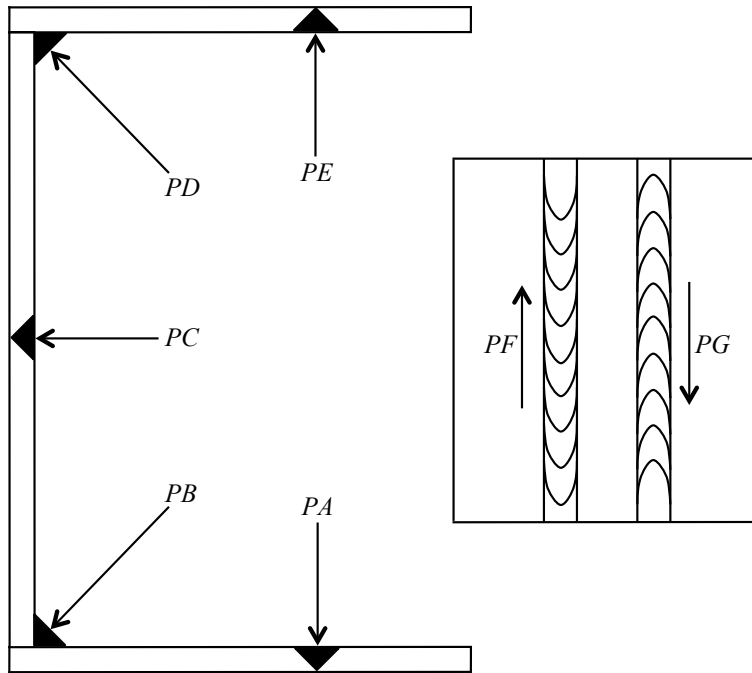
Welding positions according to EN-ISO 6947
